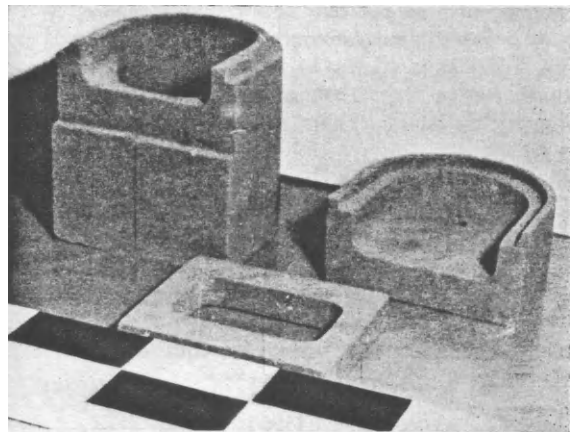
Blind feeder head moulded entirely as an exothermic core can be rammed up with the mould in inaccessible positions.
